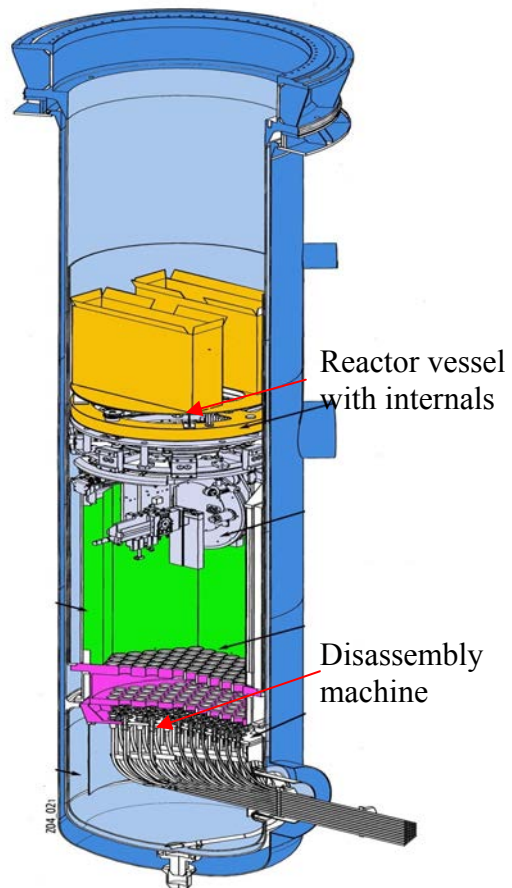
Position of disassembly machine in the reactor vessel during its operation.
